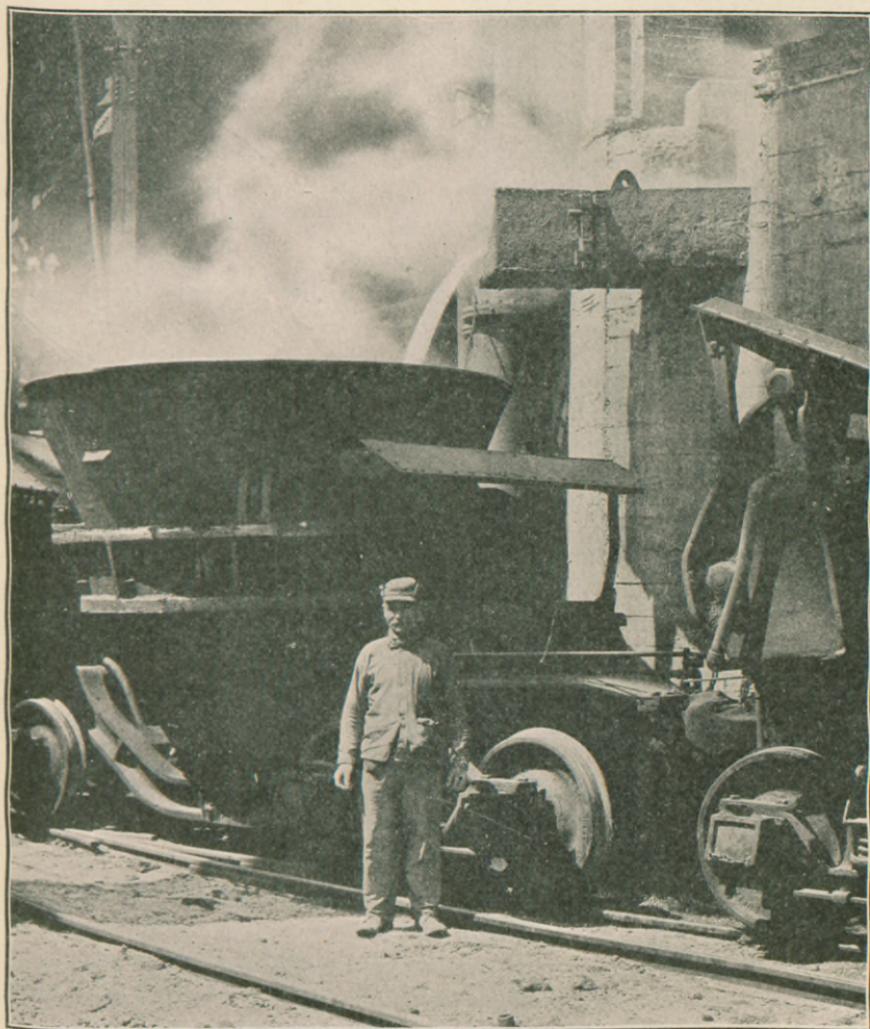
Man standing near cinder ladle. Keep away from cinder and iron ladles while they are being filled. They may explode or boil over.
